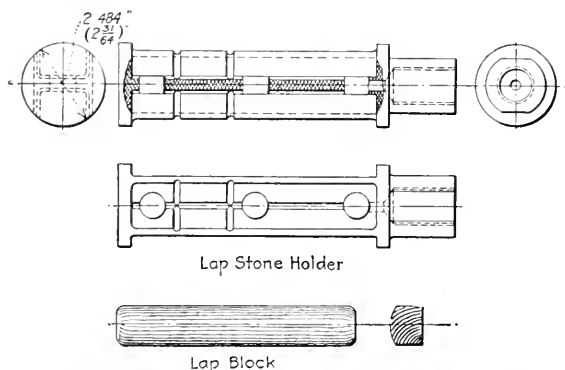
DETAILS OF LAPPING HEAD AND STONE USED FOR LARGE HOLE
